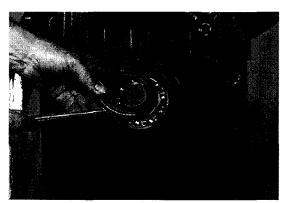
Install new "O"-ring on rear oil seal sleeve.
